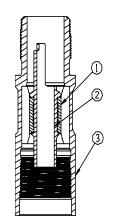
End Cap Components 1-Shock Absorber, 2-Valve Guide, 3-End Cap
